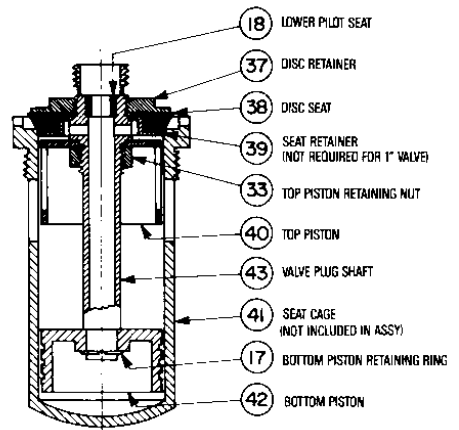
MAIN VALVE ASSEMBLY (Item 41 not included)
